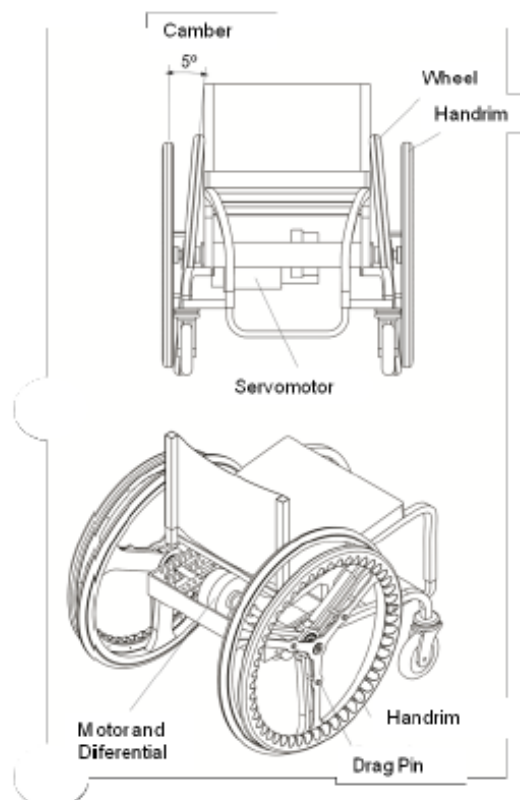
Schematic drawing of assistive wheelchair: front view (above) and isometric rear view (below).
